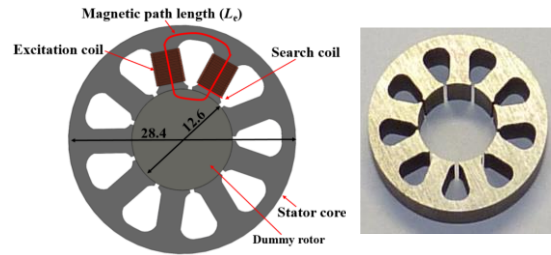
Dimensions and photograph of the stator core for a small, high-speed, and high power density motor.
